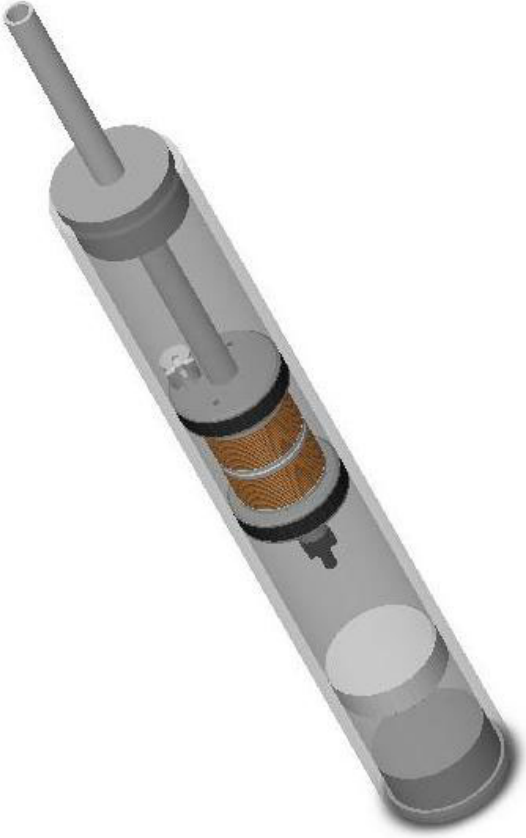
A solid model of the damper showing the piston/magnet assembly.
